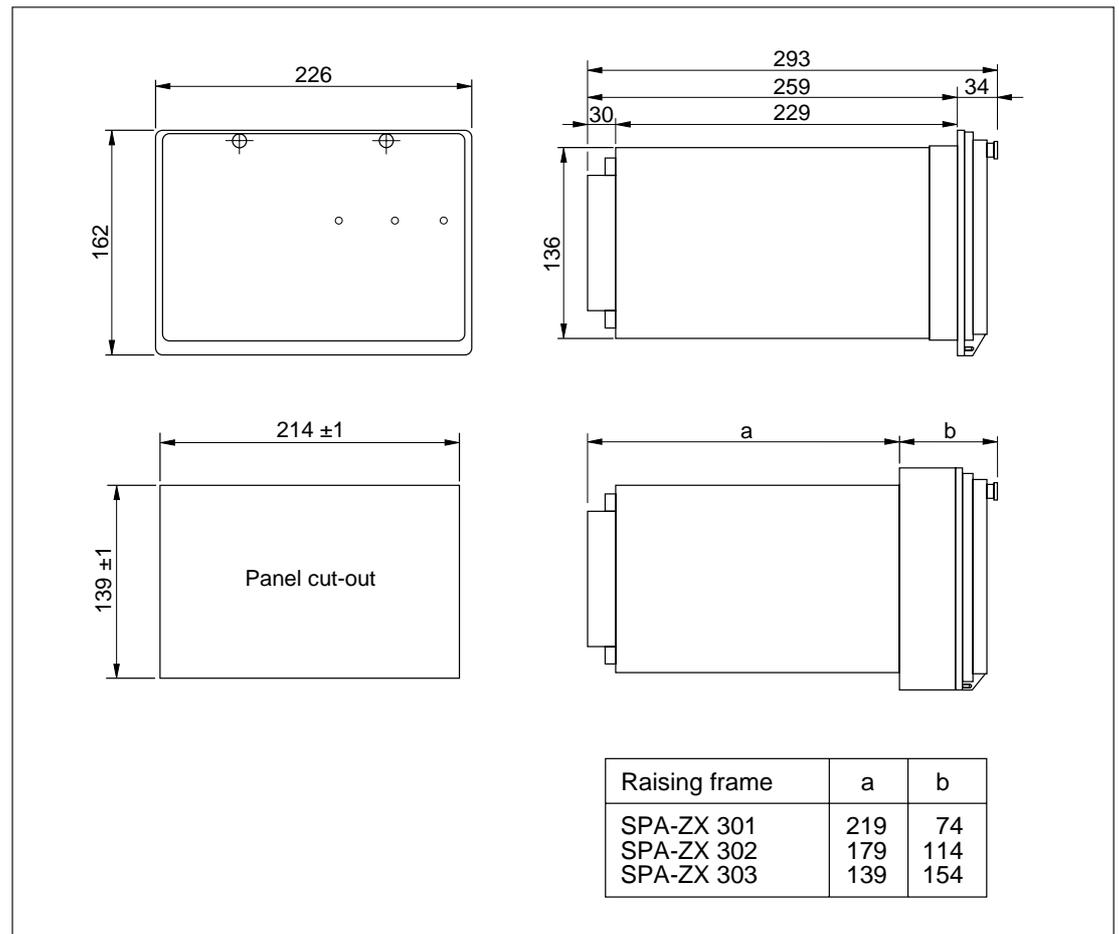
Dimension and mounting drawings for feeder protection relay SPA 348 C.
